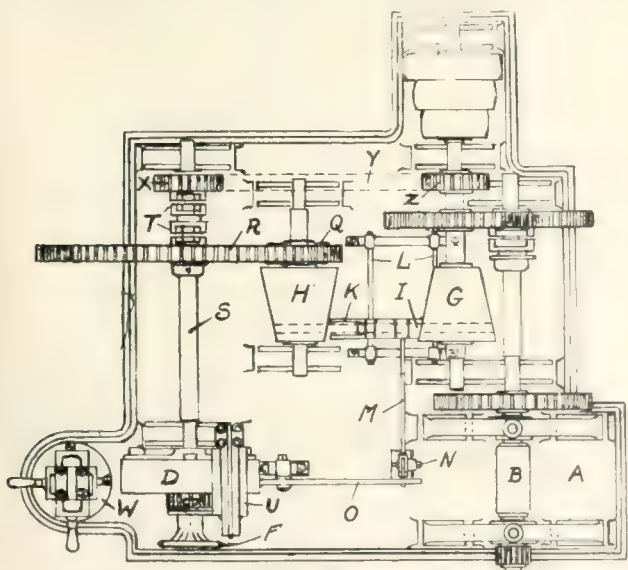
TOP VIEW OF BRIDGE TIRE MACHINE.
